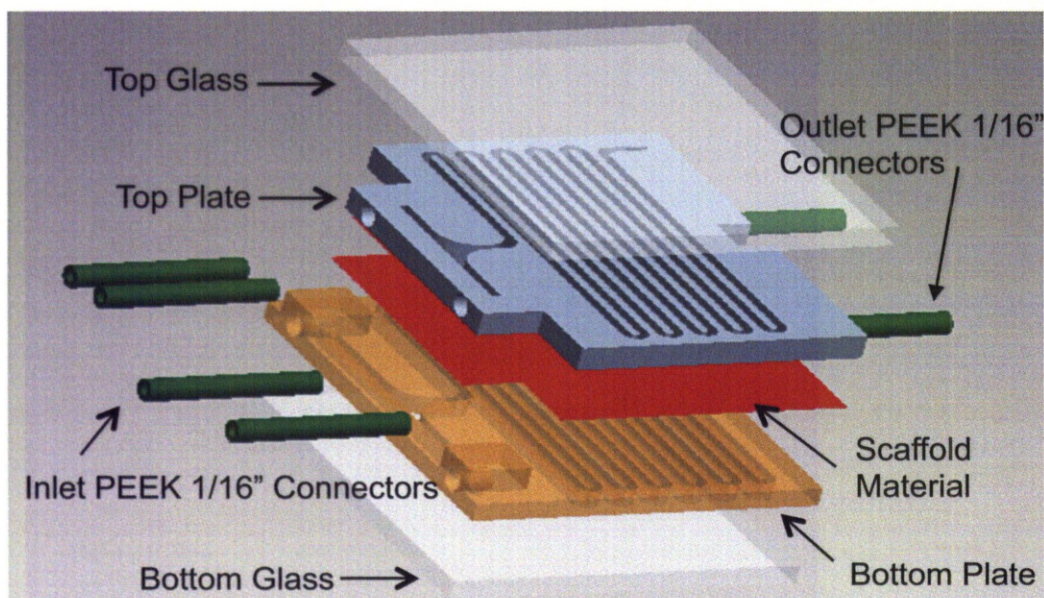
Exploded View of the Polymer Micro Reactor Assembly.
